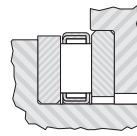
Typical mounting of a thrust bearing when the shaft rotates
